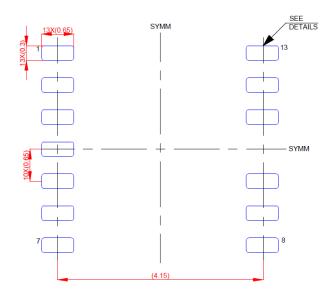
LGA13 5-mm x 5-mm Package Board Layout Example(mm)
